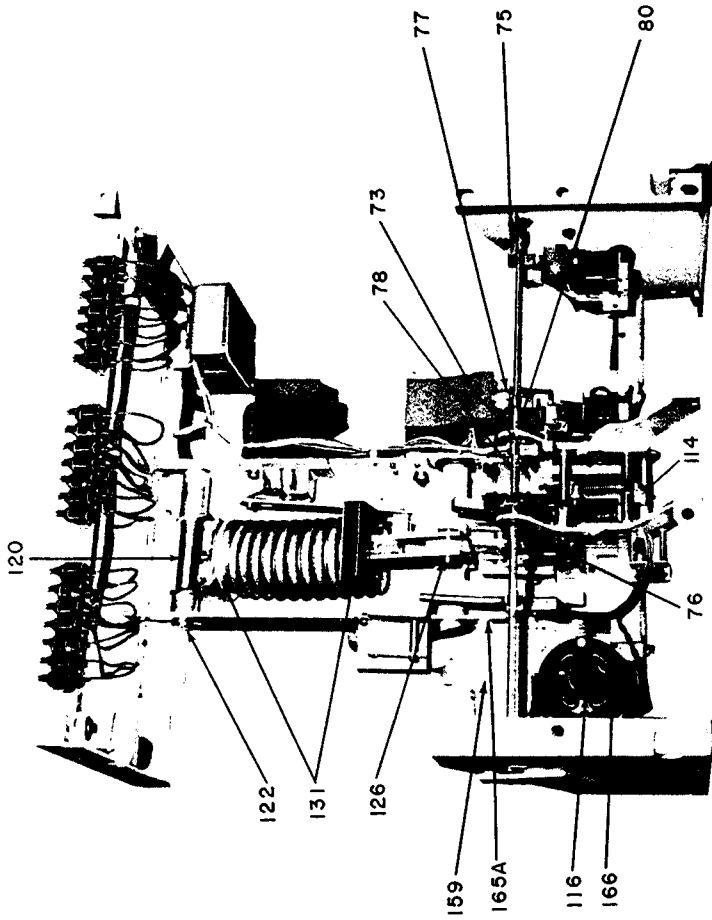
Front frame assembly for Type AK-3-75 breaker, rear view.
